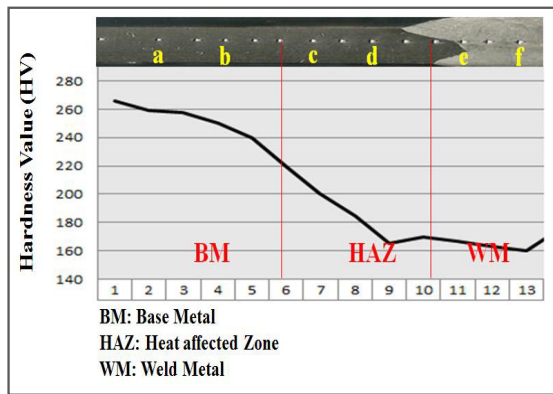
Position of the hardness indentation on 316 welded joint which is taken from left to right- arc current 110A
